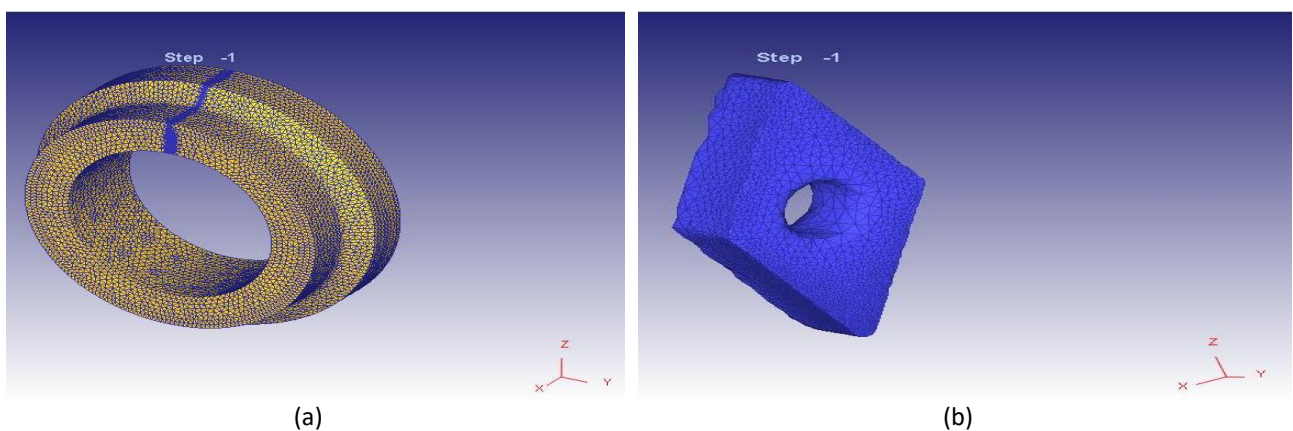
(a) Meshed workpiece and (b) cutting tool on DEFORM 3D
